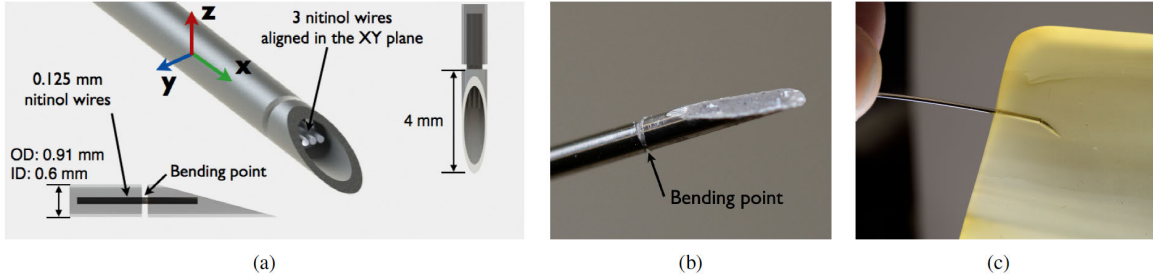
Flexure-tip needle design. The nitinol wires that comprise the flexure joint bend at the gap between the needle shaft and the tip as forces are applied to the bevel tip by tissue. (a) A CAD drawing of the flexure-tip needle concept with dimensions shown. (b) A close-up of the flexure-tip prototype. The nitinol wires are held in place by a cold weld epoxy in both the bevel tip and the needle shaft, which begin as tubes. (c) The flexure-tip bends in the direction of the bevel when inserted into tissue due to reaction forces on the bevel that cause the nitinol wires to deflect, thus kinking the tip of the needle.
